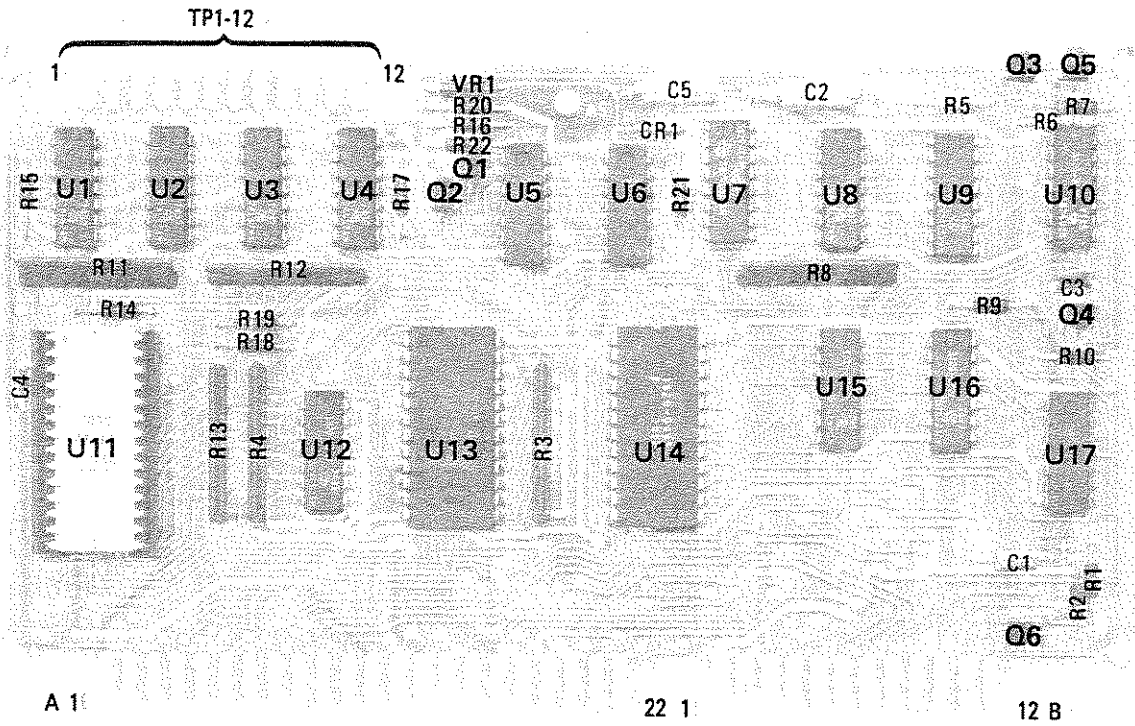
A5 Controller Assembly Component and Test Point Locations
